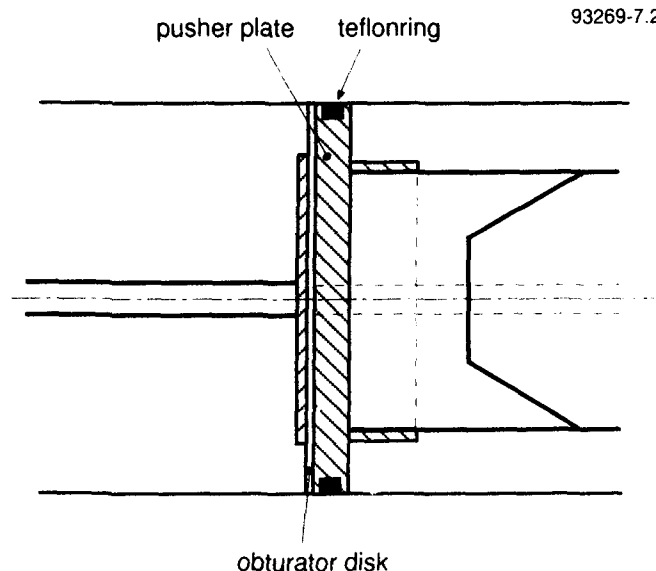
Detail of the pusher plate, with obturator disk, driving band, and missile mount
